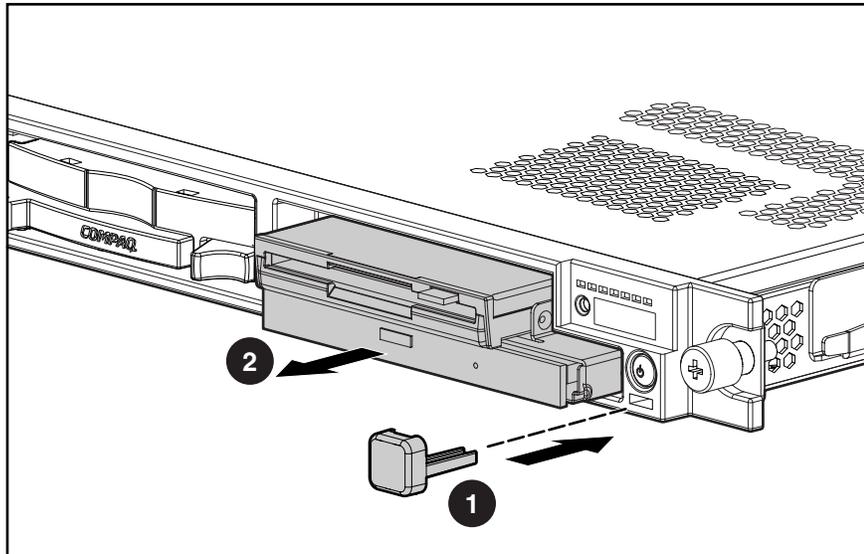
Ejecting the CD-ROM/diskette drive assembly
